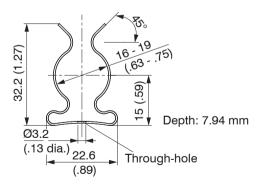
Dimensional drawing of mounting clamp, dimensions in mm (inches)
